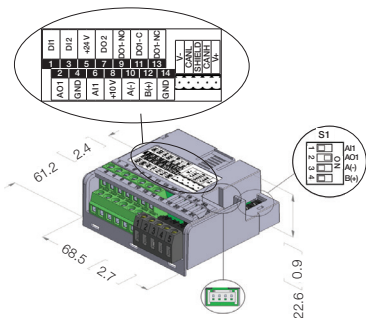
CAN500 dimensions in mm [in], DIP-switches location and MMF connector
